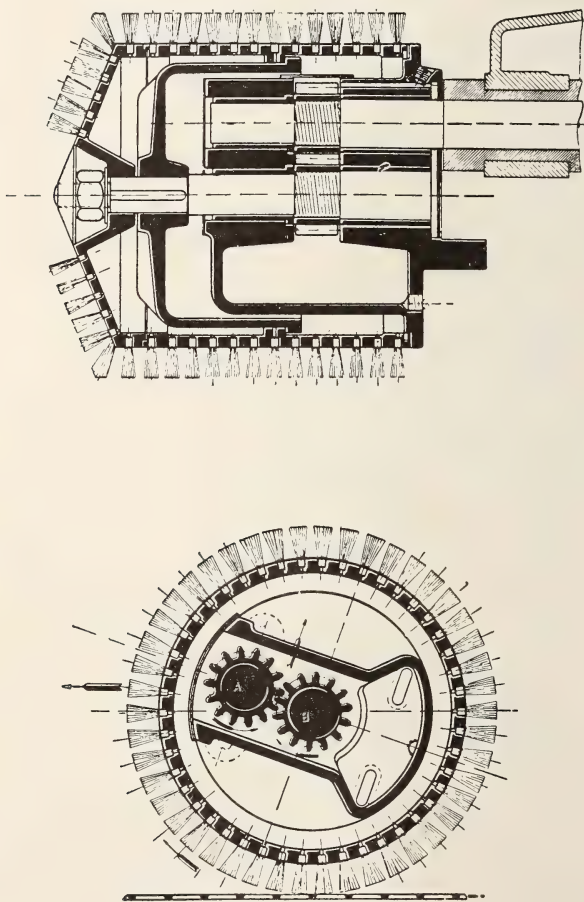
The Gear Driving Mechanism of the Rotating Brushes
